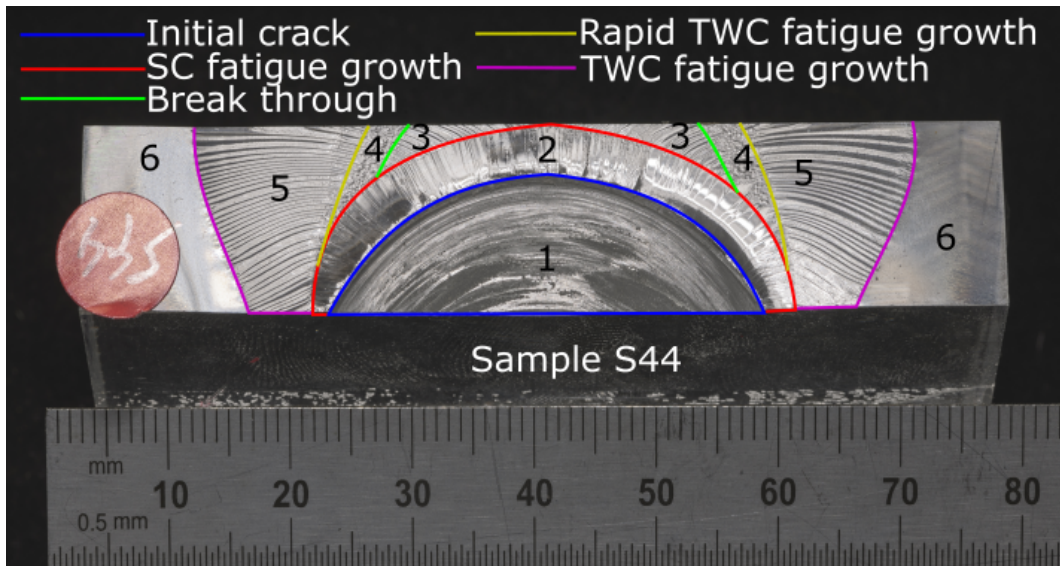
Test on Perspex plate - Fracture surface - Sample S44
